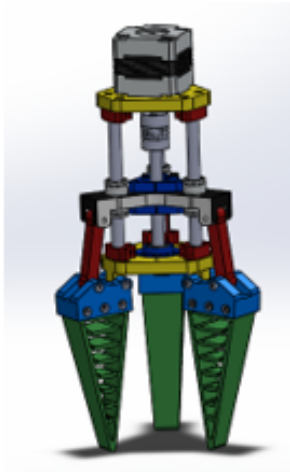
CAD model of the three finger Fin Ray gripper assembly.
